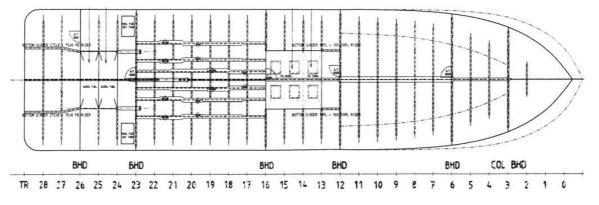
The structural arrangement of the bottom plan of the crew vessel
